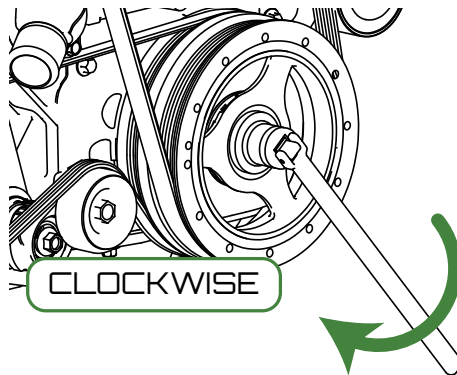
Rotating the Engine Crankshaft with a Breaker Bar
